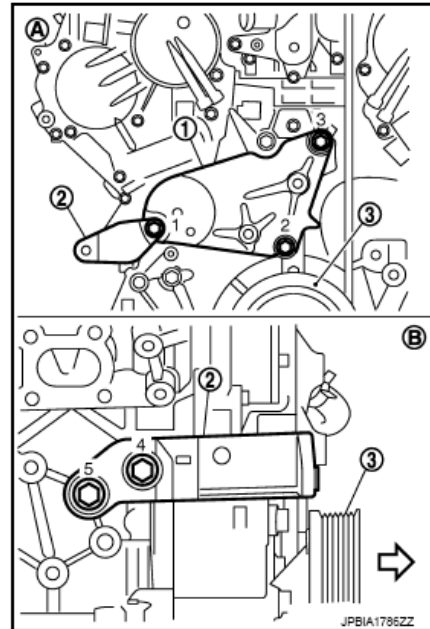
Identifying Auto-Tensioner Bracket, Oil Pump Bracket And Crankshaft Pulley
